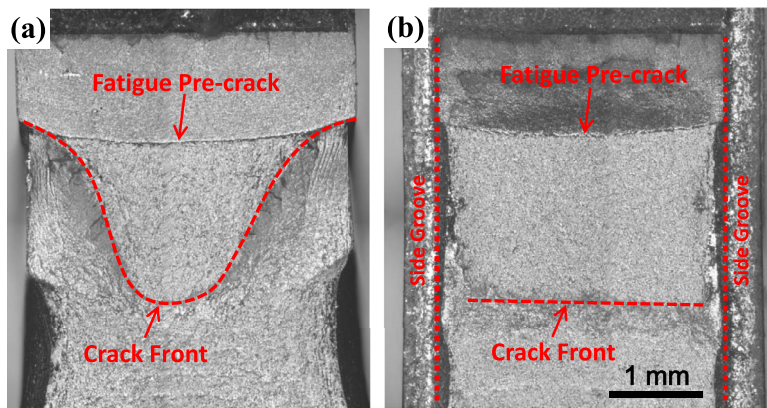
Overall fracture surfaces for (a) the non-side-grooved and (b) the side-grooved specimens, a verification that the crack tunneling as shown in (a) can be suppressed by side grooving.
